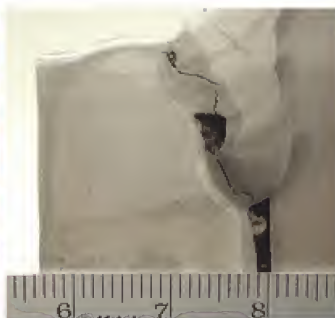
Cracks were observed in this tank shell-to-nozzle weld
